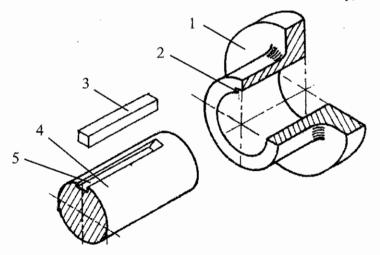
Key and keyway (Parallel sunk key) 1. Hub 2. Keyway in the hub 3. Key 4. Shaft 5. Keyway in the shaft
